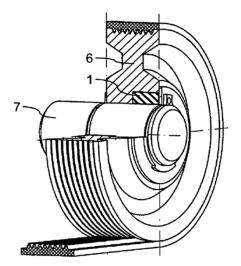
TVD invention for coupling two machine parts (Feldmeier, 2013:p.2, Fig. 1, Copyright © 2013 by GMN Paul Müller Industrie GmbH & CO. KG, Reprinted by Permission of GMN Paul Müller Industrie GmbH & CO. KG)
